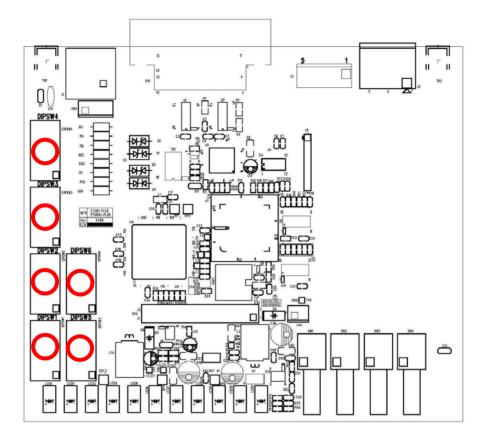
ETU01 DIP Switches, Version 1.2G PCB
